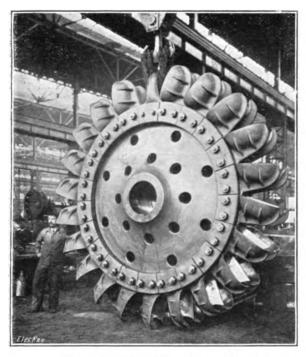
Pelton Wheel of 11,000 b.H.P.
